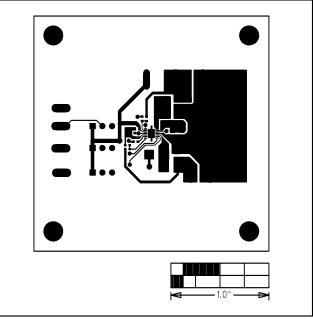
MAX8614 EV Kit PC Board Layout—Component Side
